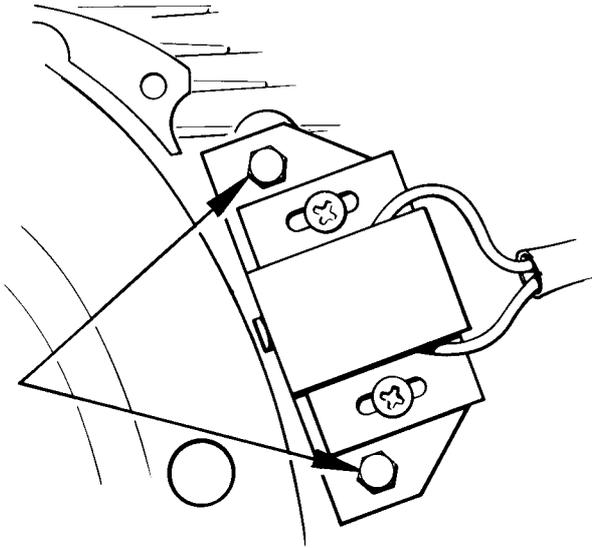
Ignition pick-up trigger unit (Release two screws)
